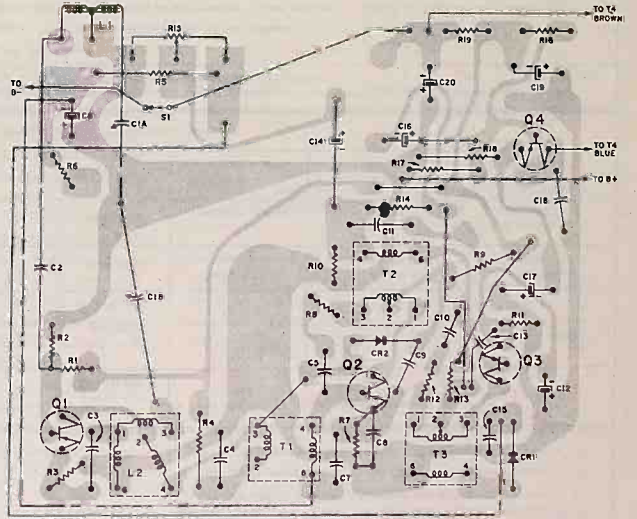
View of printed Wiring Board. NOTE: Gray area represents printed wiring, black symbols and lines represents components, wiring and connections on opposite side.
